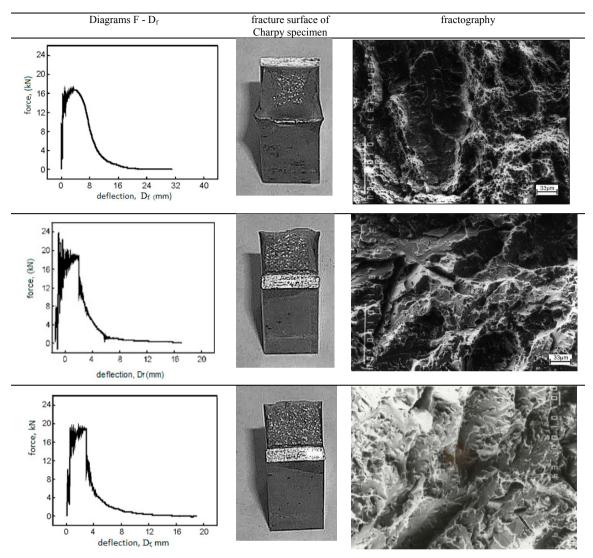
Fracture analysis at 20°C, -40°C and -55°C; diagram F-D_{fi}; fracture surface of Charpy specimen; fractography.
